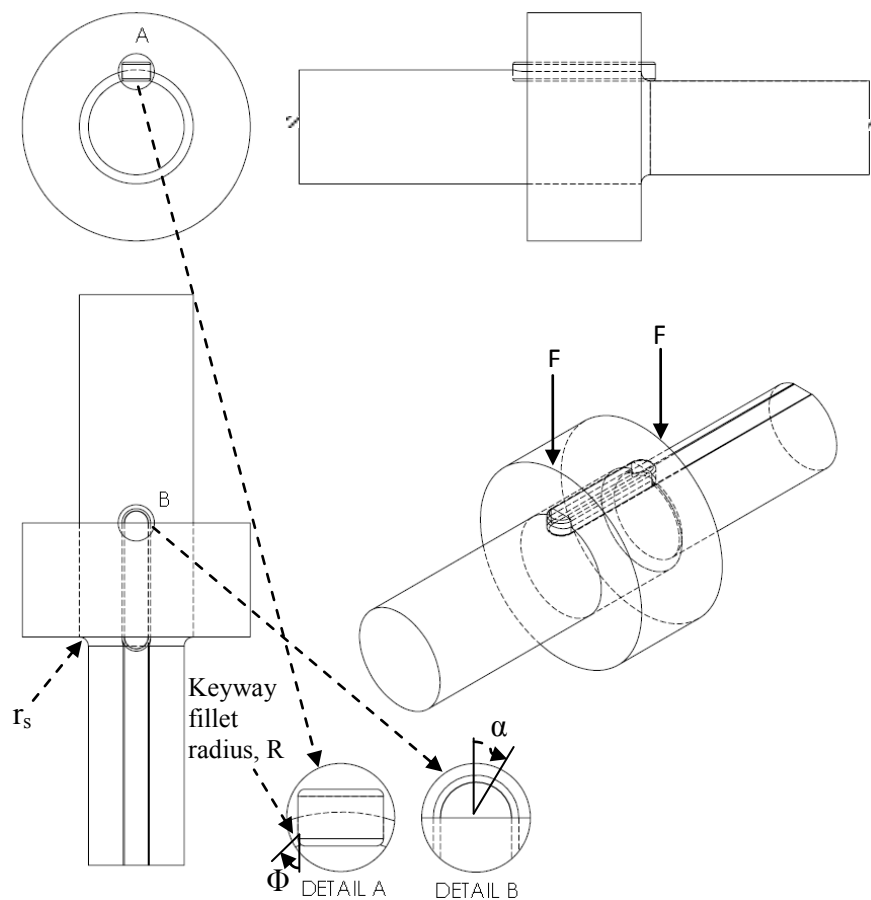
Bending model of hub, key and a stepped shaft with end milled keyway
